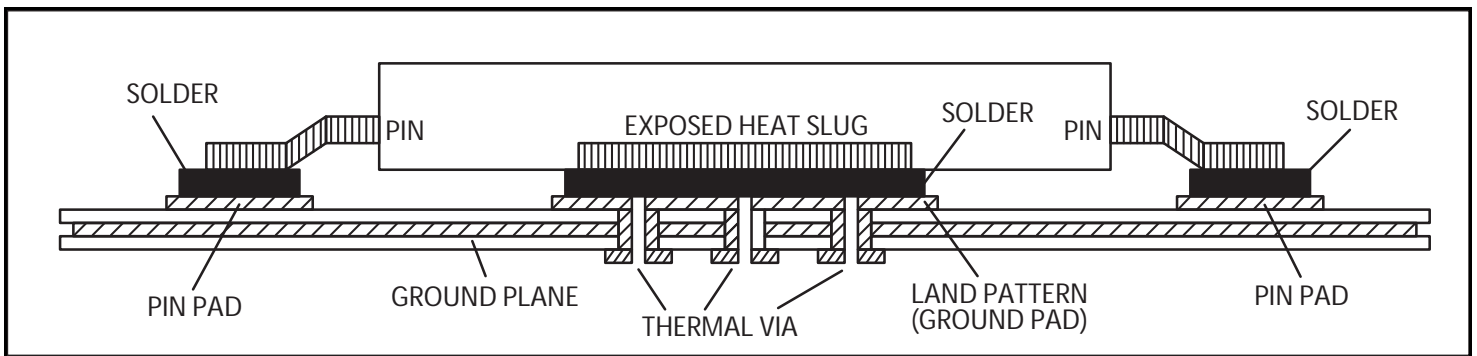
P.C. Assembly for Exposed Pad Thermal Release Path - Side View (Drawing not to Scale)
